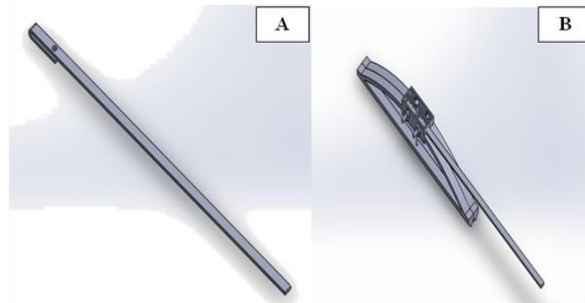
(A) Wiper arm (B) 3D view of the proposed wiper
